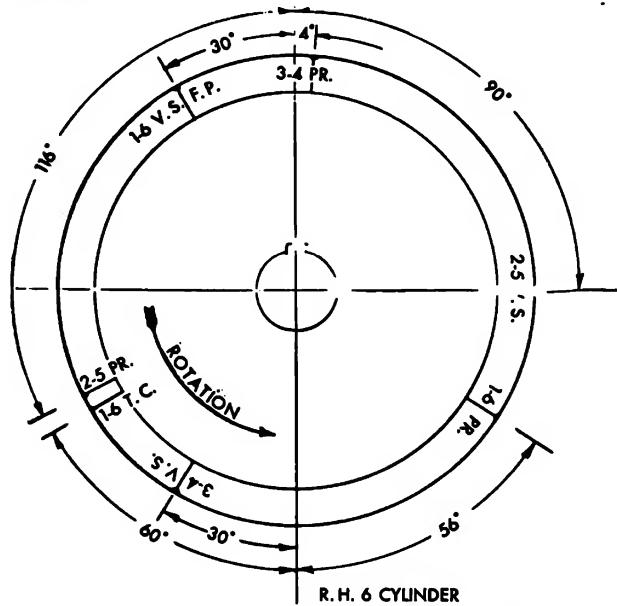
Timing marks on 6 cylinder right hand engine fan drive pulley
